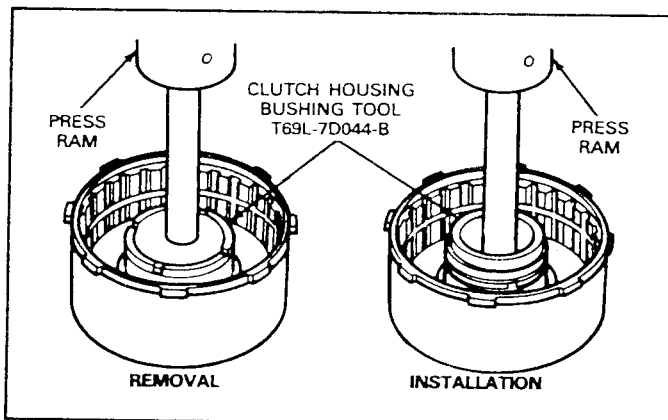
Replacing Reverse-High Clutch Rear Bushing
